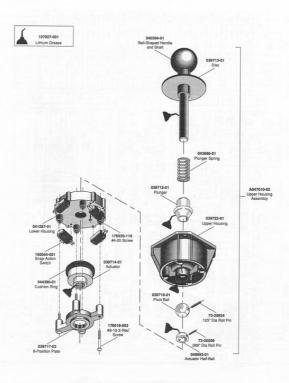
Microswitch Joystick Assembly A040933-03 B
